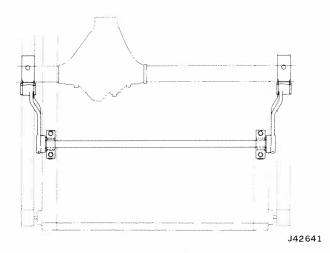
Front Stabilizer Bar, Model 46 8000 GVWR
